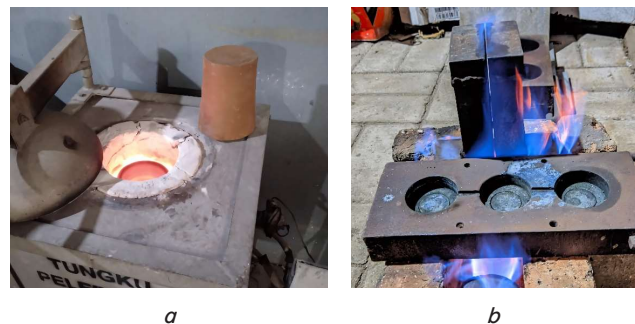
The casting process of recycled brass alloys and the preparation process of specimen molding: *a* – casting process; *b* – molding preparation process
